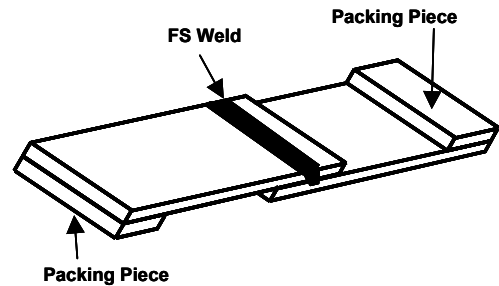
Packing pieces in single-lap-tension-shear specimens.
